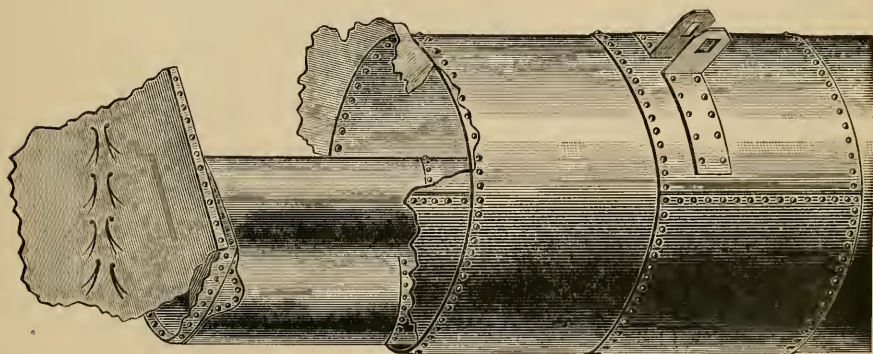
FRONT END OF BOILER AFTER THE EXPLOSION.
